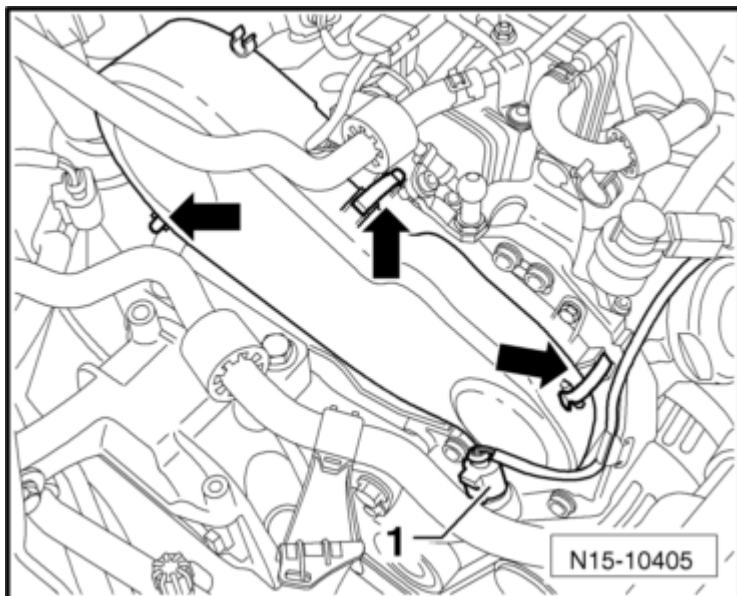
Identifying Connector -1- And Clips -Arrows-
